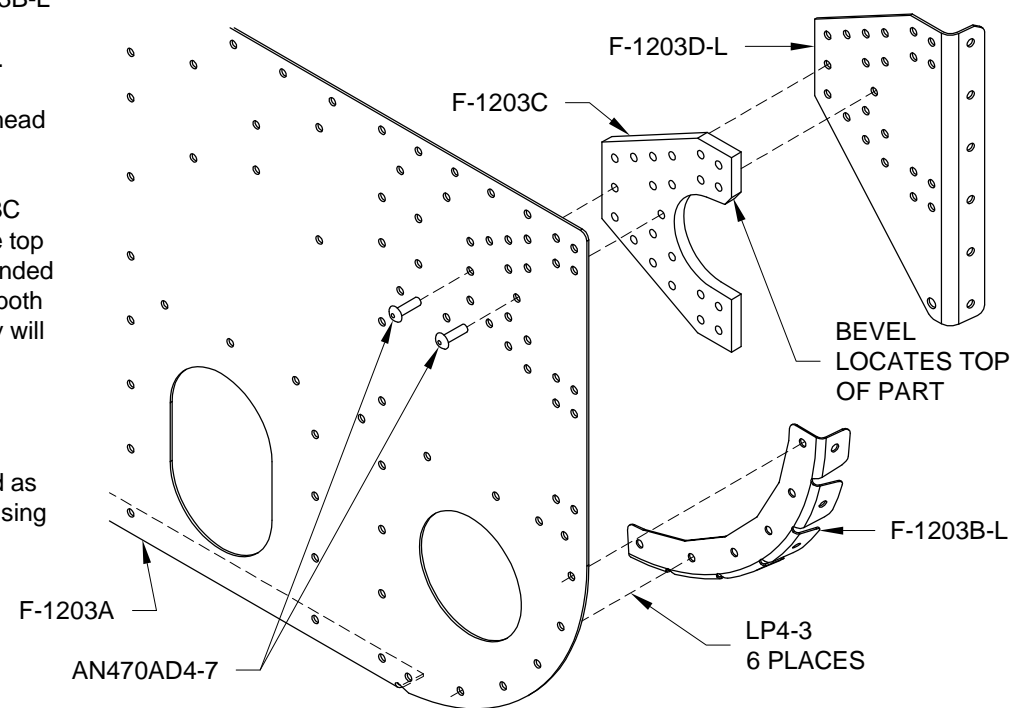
RIVETING THE F-1203A BULKHEAD
